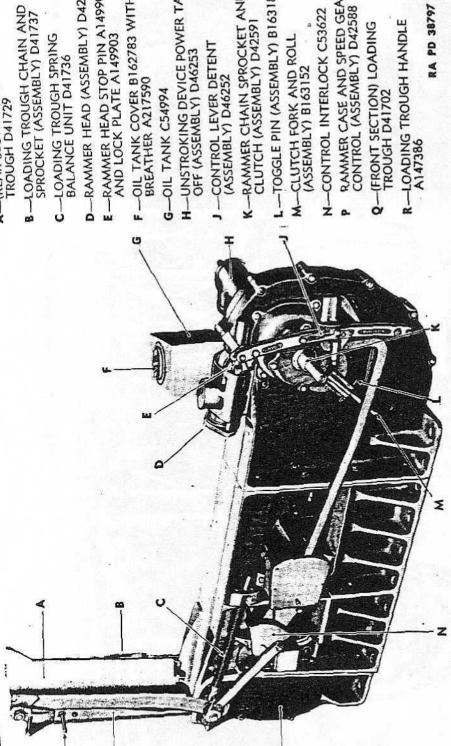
Rammer (Left Side) with Loading Trough in Folded Position (Parking Tables Removed)
